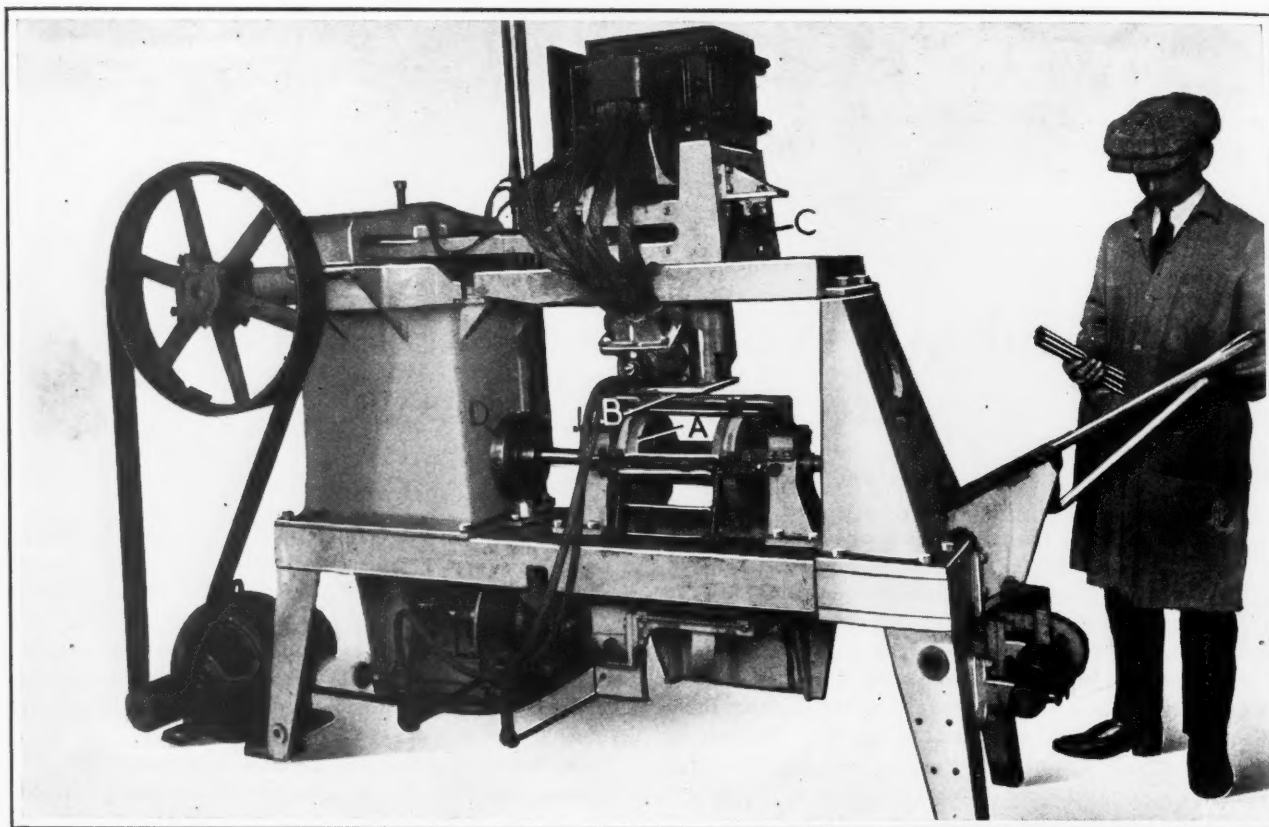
Butt-welding Machine on which the Spokes are welded at the Seam
